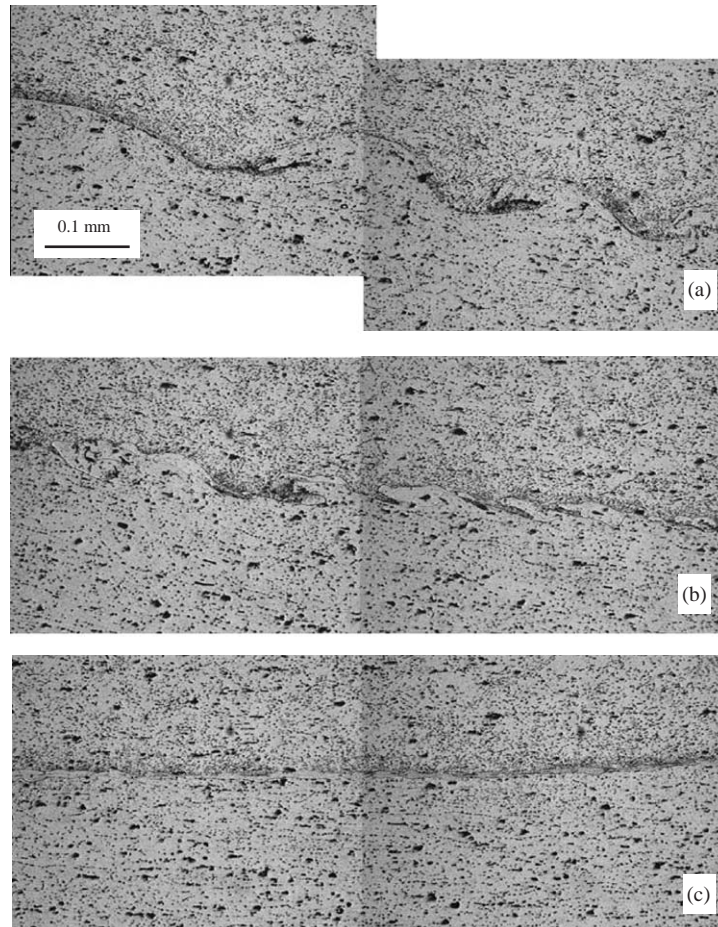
Weld interface for initial angle $\alpha=4^\circ$: (a) initial portion; (b) transition portion; (c) final portion.
